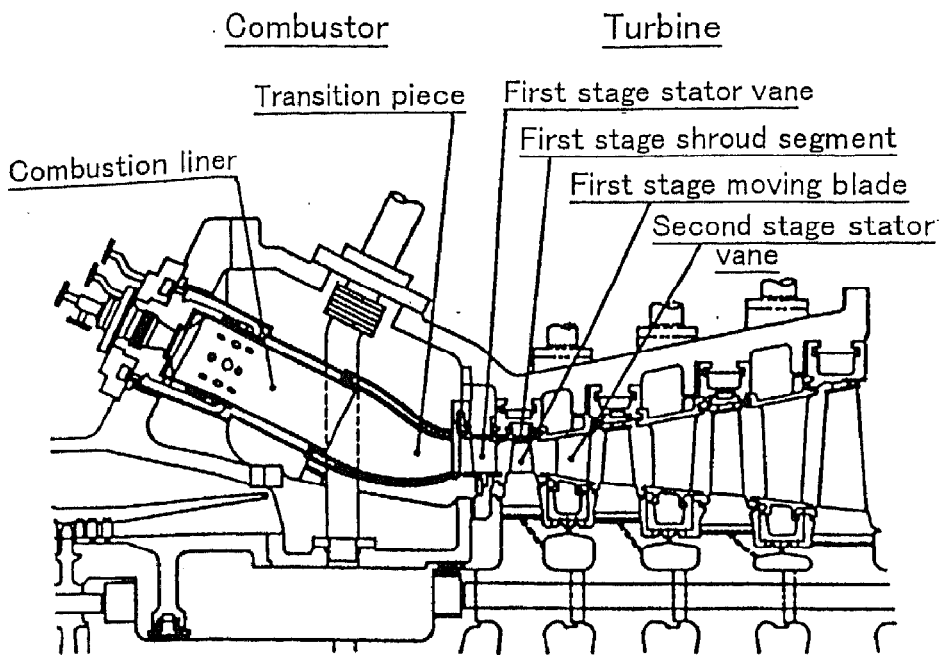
Cross-section of gas turbine hot section ; combustor and turbine
